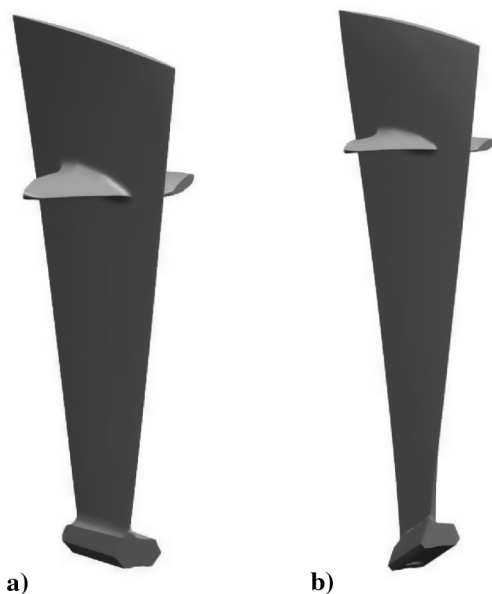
Blades of a) wheel 1, and b) wheel 2.
